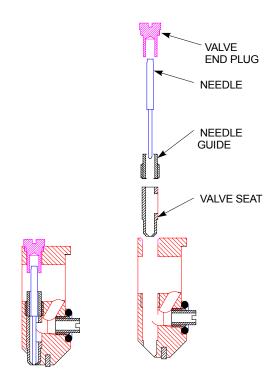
35-51 EXTRUSION VALVE
